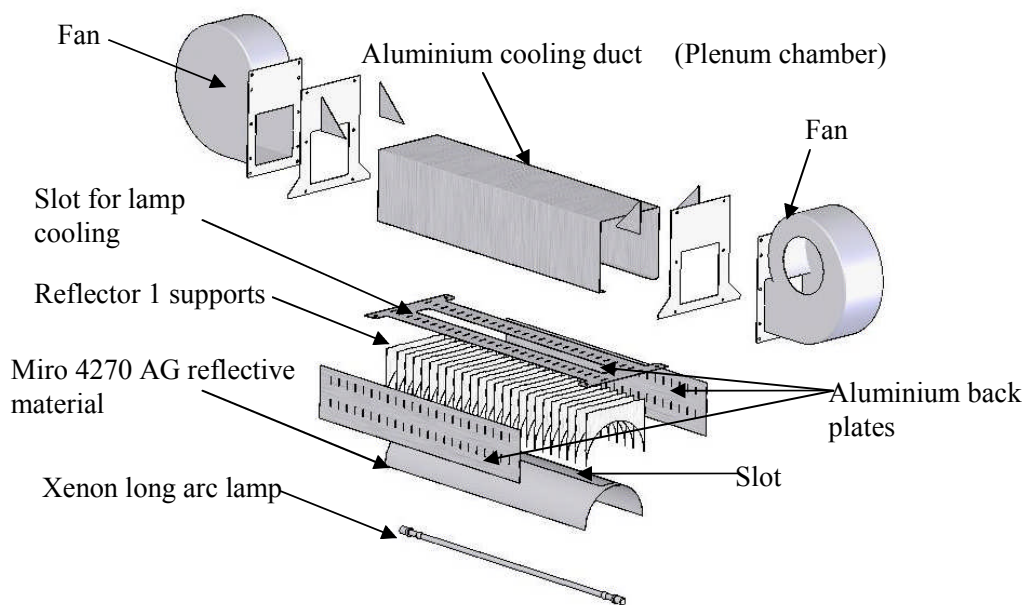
An exploded view of the reflector 1 supports, back and side aluminium plates and the lamp cooling system
